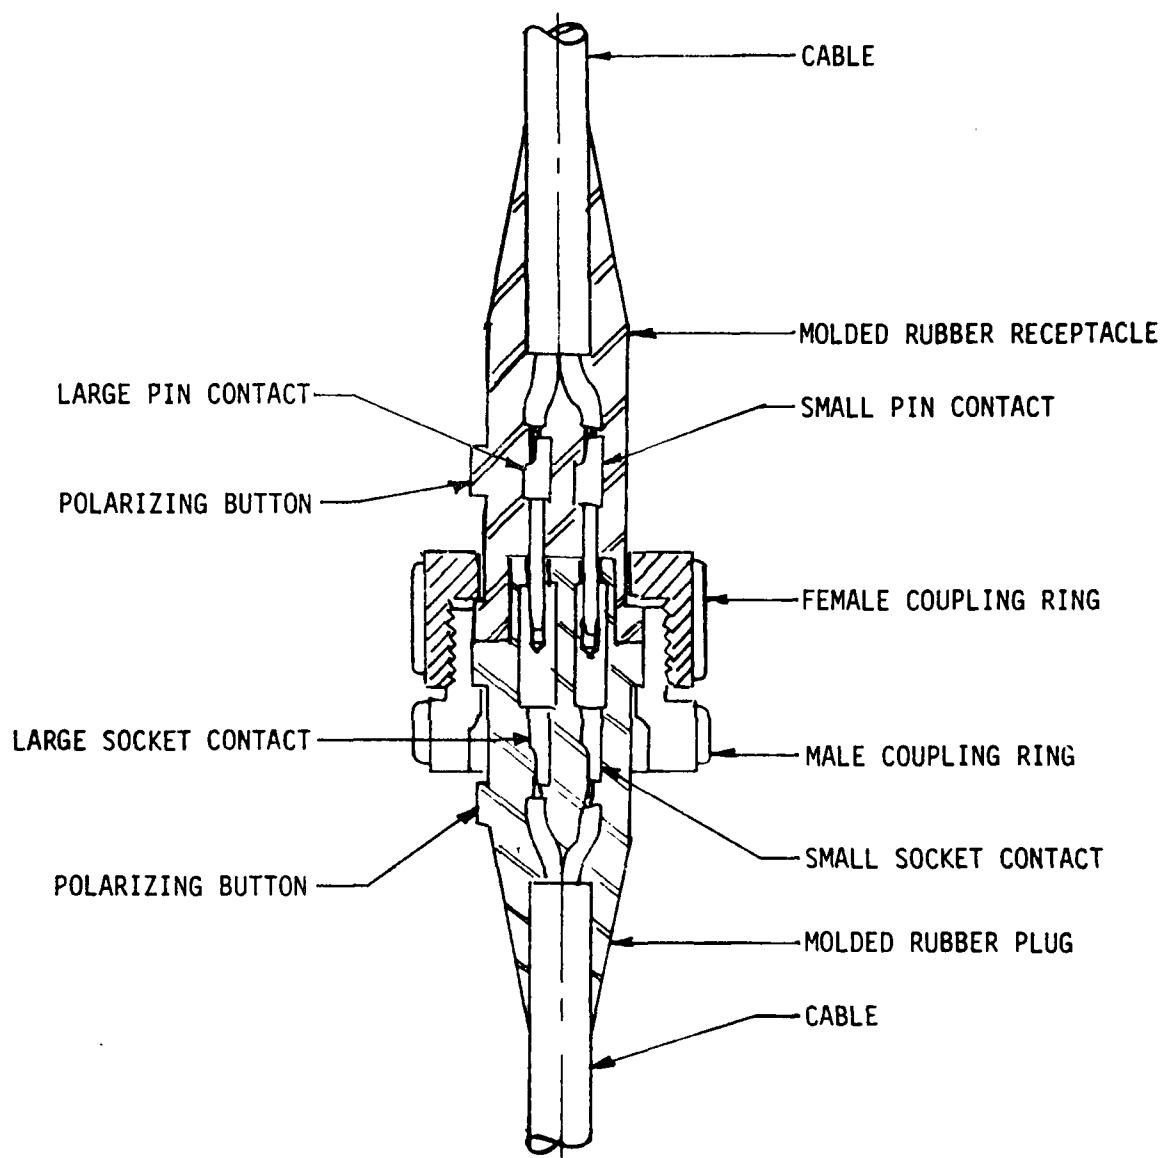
SURFACE SHIP CONNECTOR ASSEMBLY
